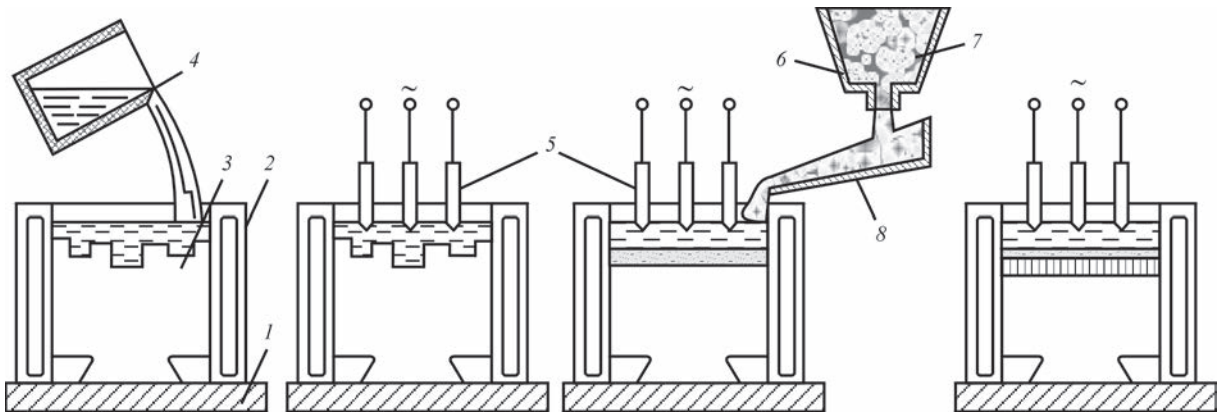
Scheme of electroslag surfacing of worn dies using chips of die steel as filler: 1 — bottom plate; 2 — fixed mold; 3 — worn die; 4 — ladle with liquid slag; 5 — nonconsumable electrodes; 6 — tank for filler material; 7 — filler material; 8 — channel
